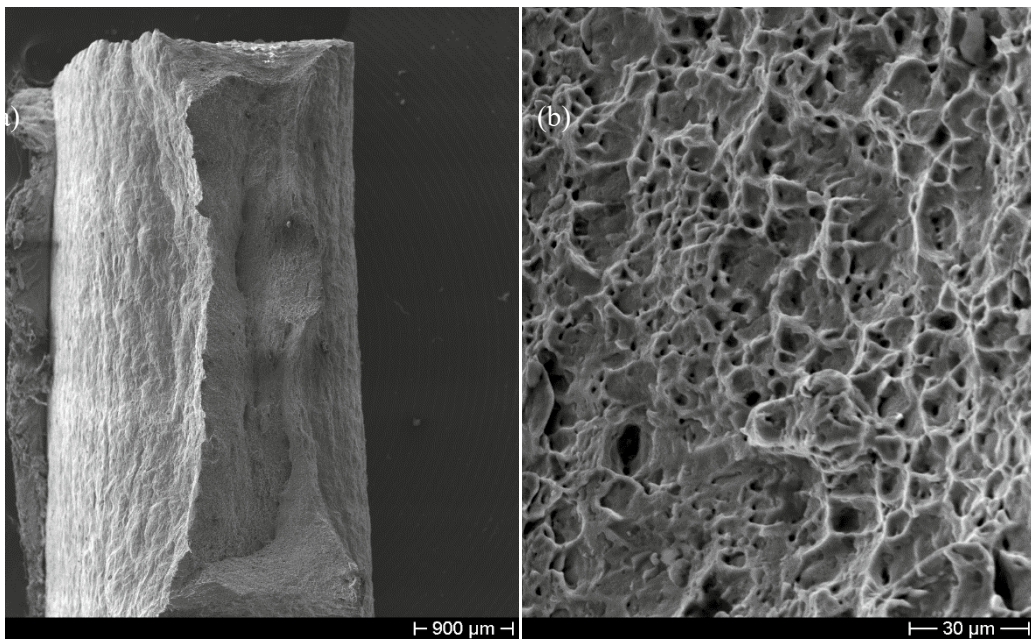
SEM micrograph showing the fracture surface of the specimen after the tensile test.
